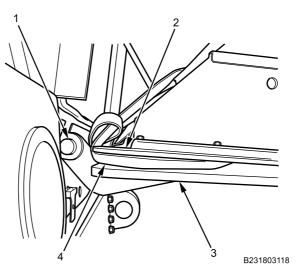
Loop Lifting Sling Around Door/Ramp Left Hinge.
